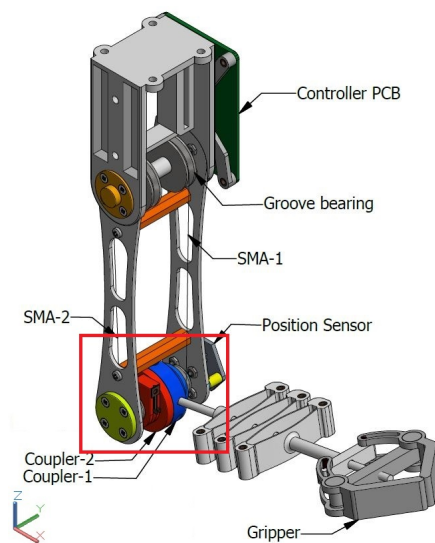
CAD model of the proposed SMA wire actuated robotic arm. Joint Mechanism.
